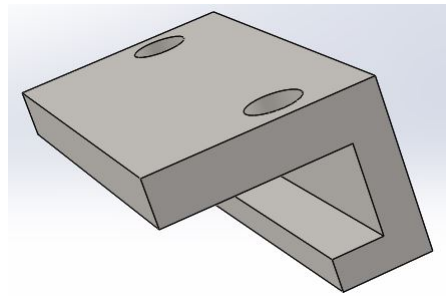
Heat Insulating Plate Of The RTM Machine
